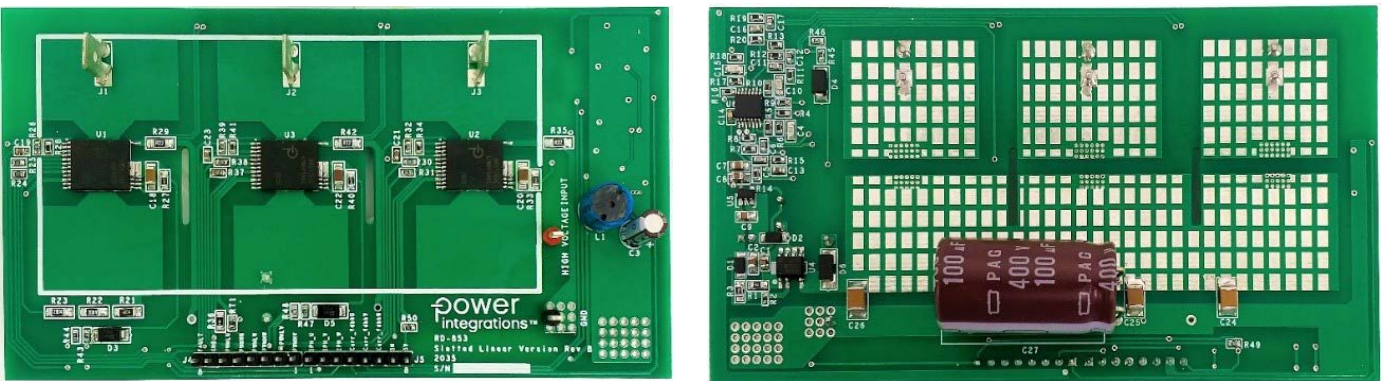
Slotted Linear PCB Configuration Board (125 mm x 69 mm).
